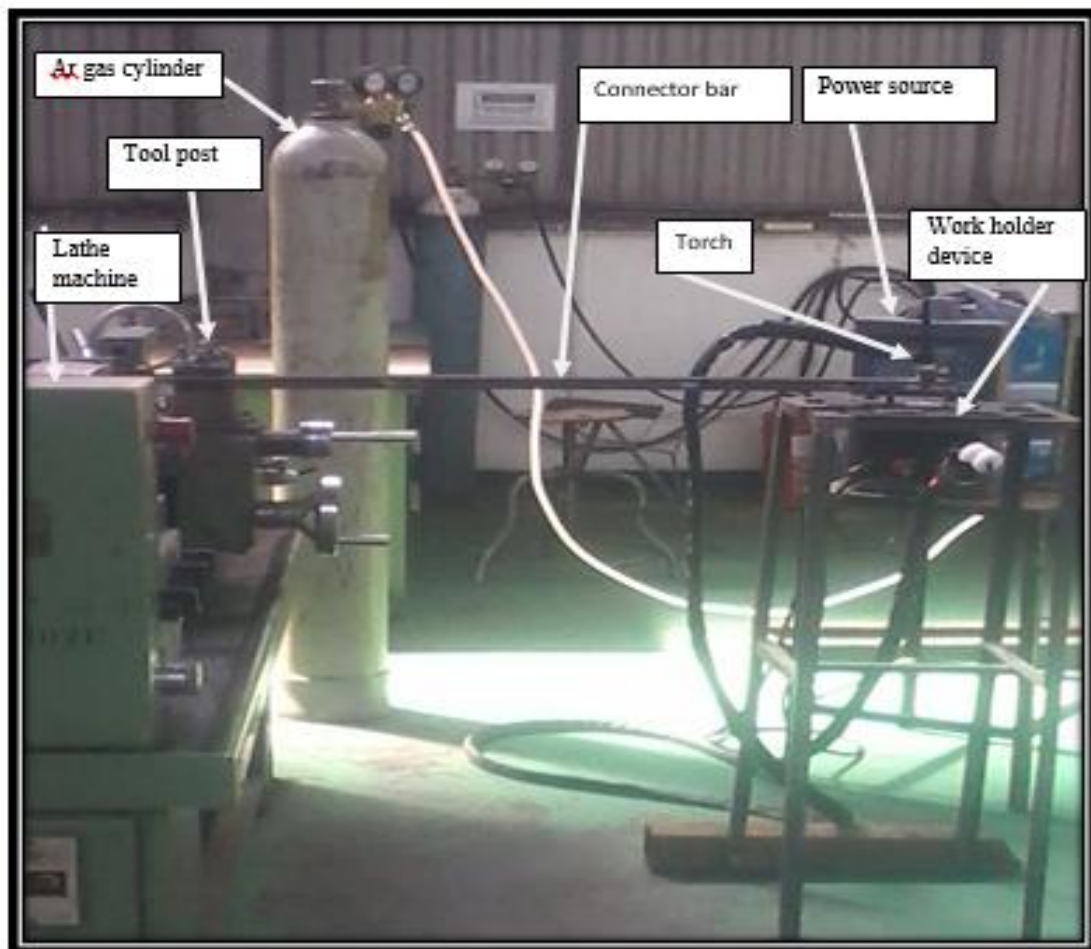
Experimental set-up for TIG welding
